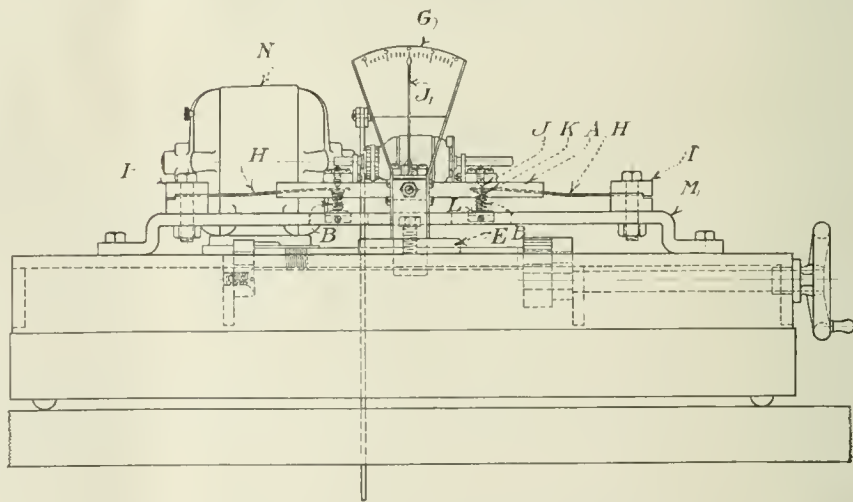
SIDE VIEW OF BALANCING MACHINE WITH MOVABLE FULCRUM
